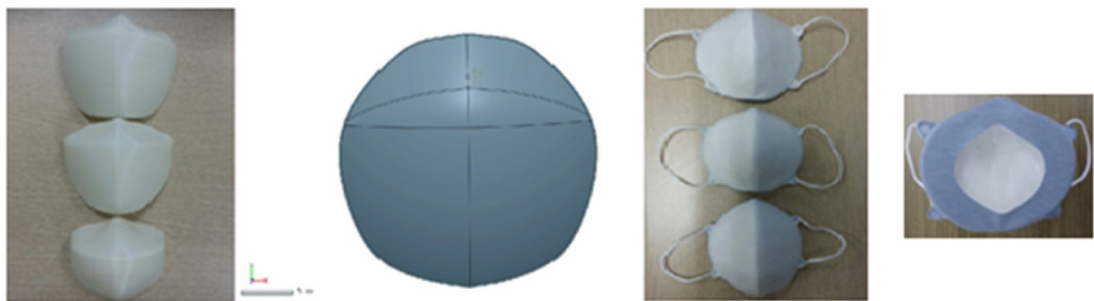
Masks printed using 3D Printer and prototype masks manufactured for testing
